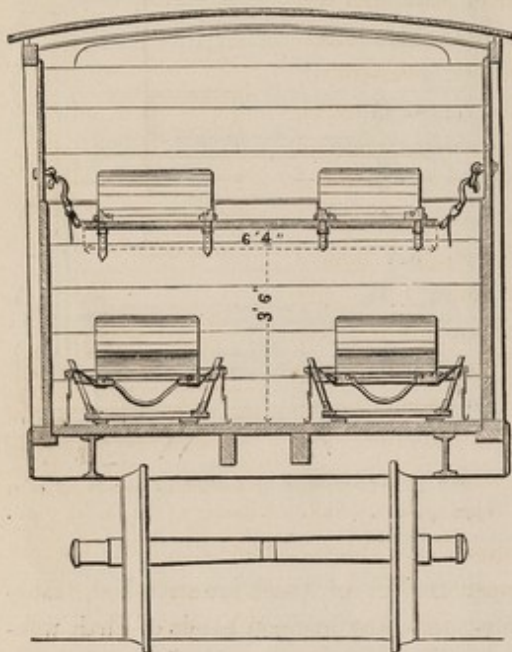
Transverse section of a baggage-car arranged on the Baden plan. [After GURLT.]
